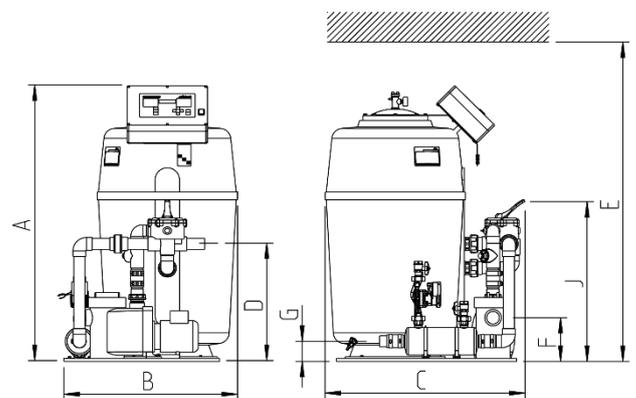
Dimensional drawing of filter system GENO-mat F 600 HK; RC
